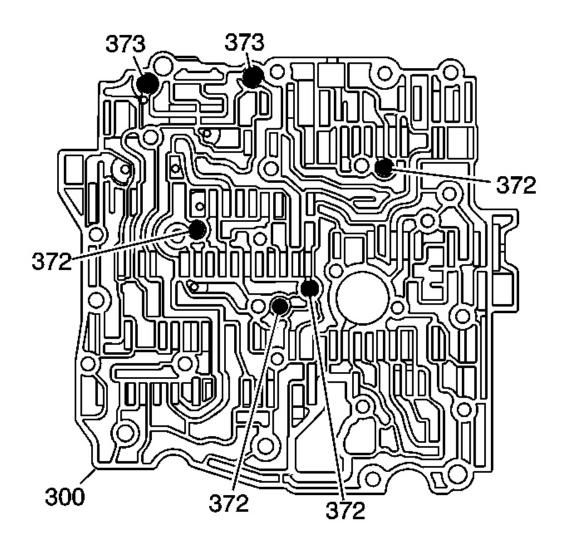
Locating Ball Check Valves In Valve Body Courtesy of GENERAL MOTORS CORP.
